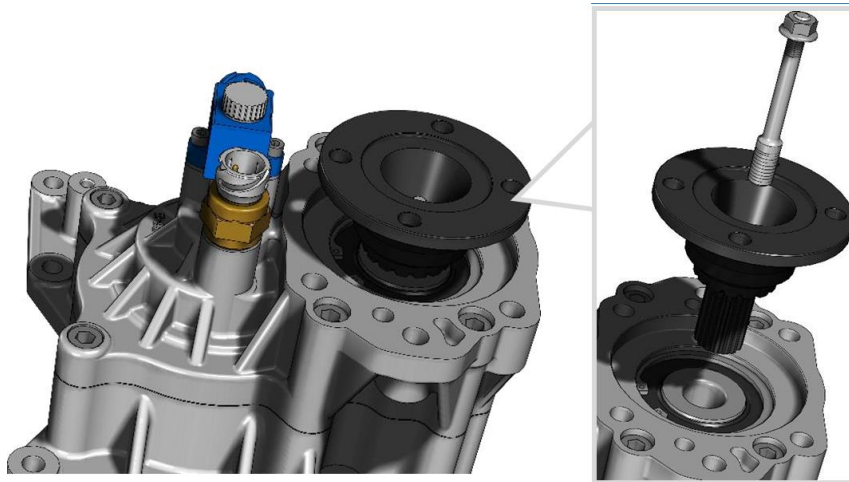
Rear DT12 PTO driveshaft assembly with driveshaft mount.
